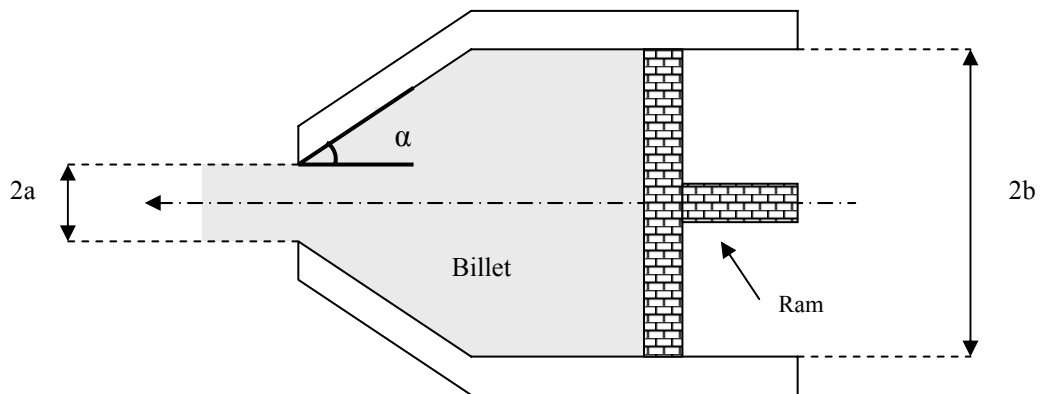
Schematic view of extrusion of cylindrical through conical die.
